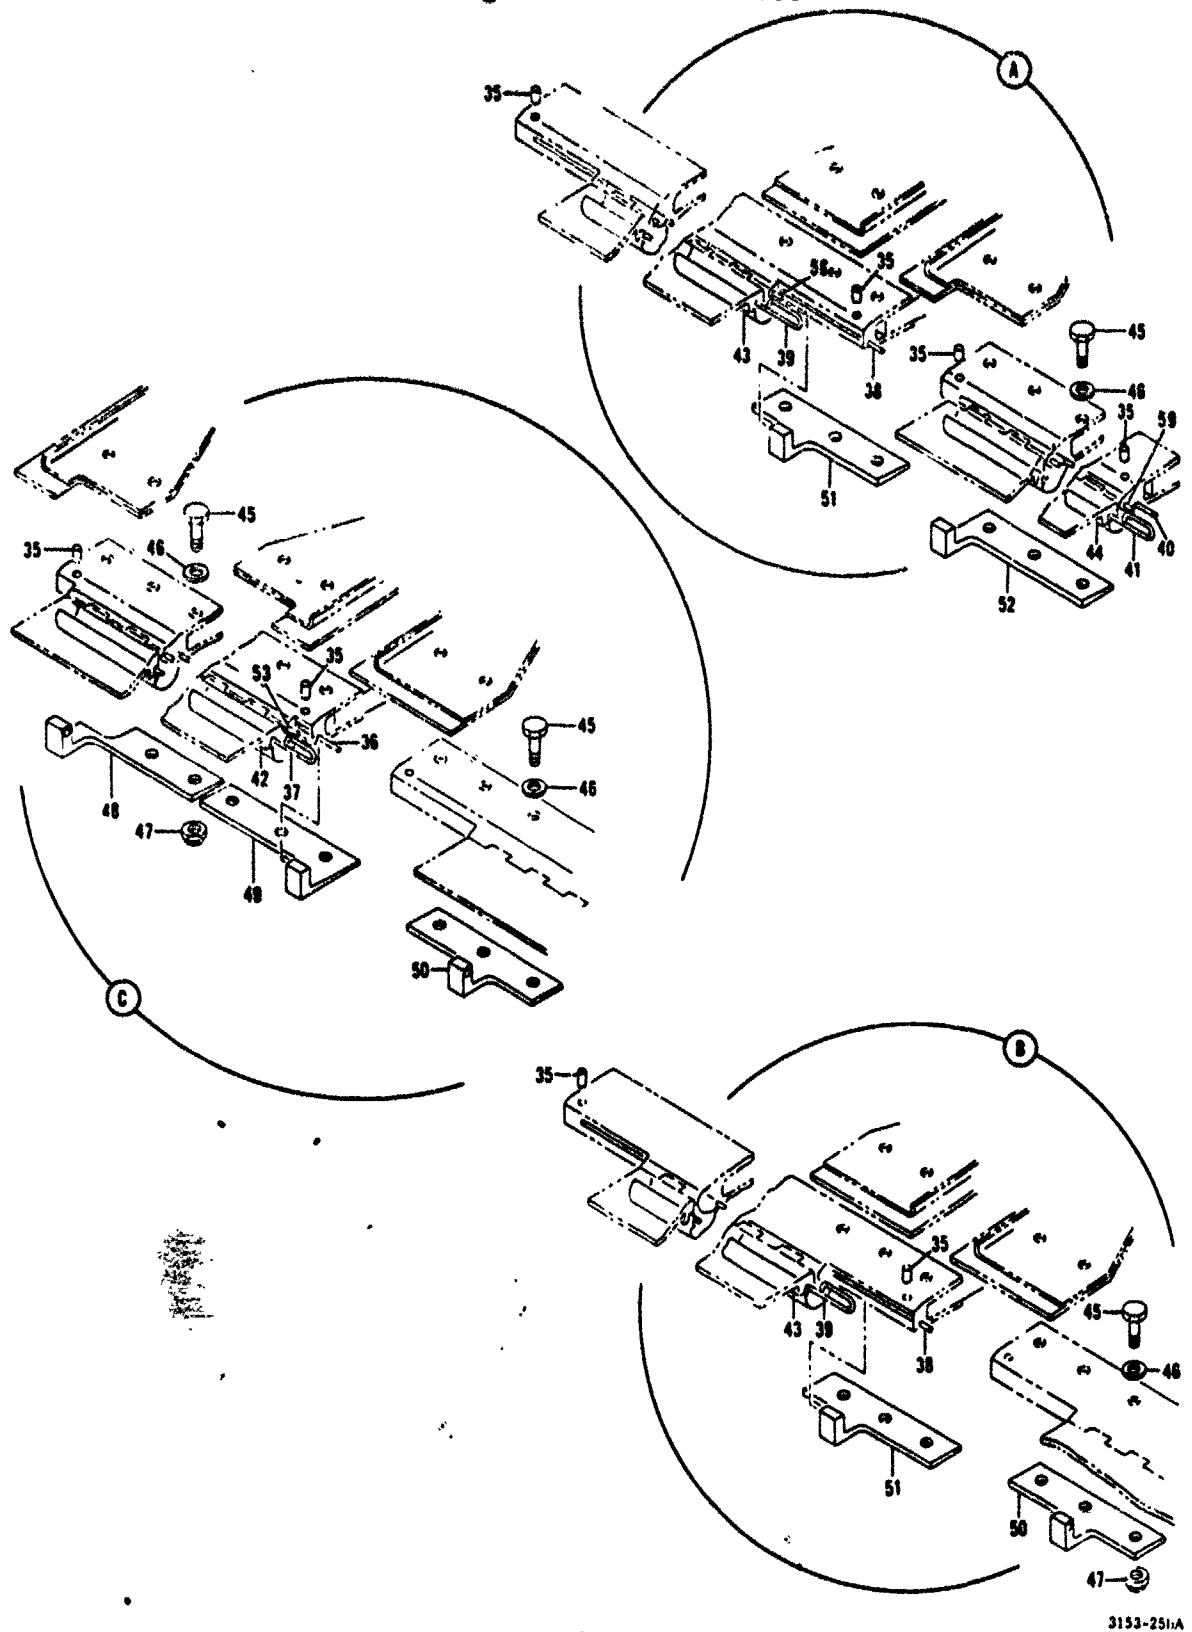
Outboard Wing Aileron and Tab Assemblies (Sheet 1 of 5)
